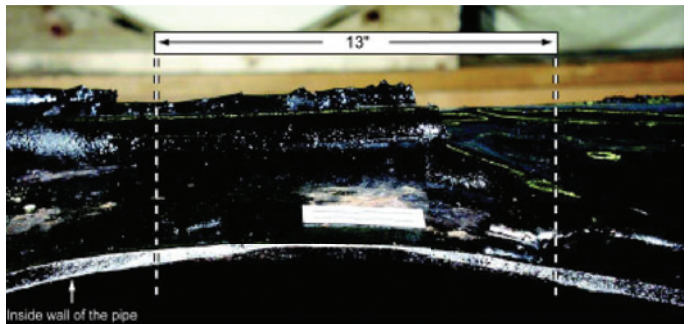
13-inch-long crack, showing penetration nearly through the pipe wall in the center.
